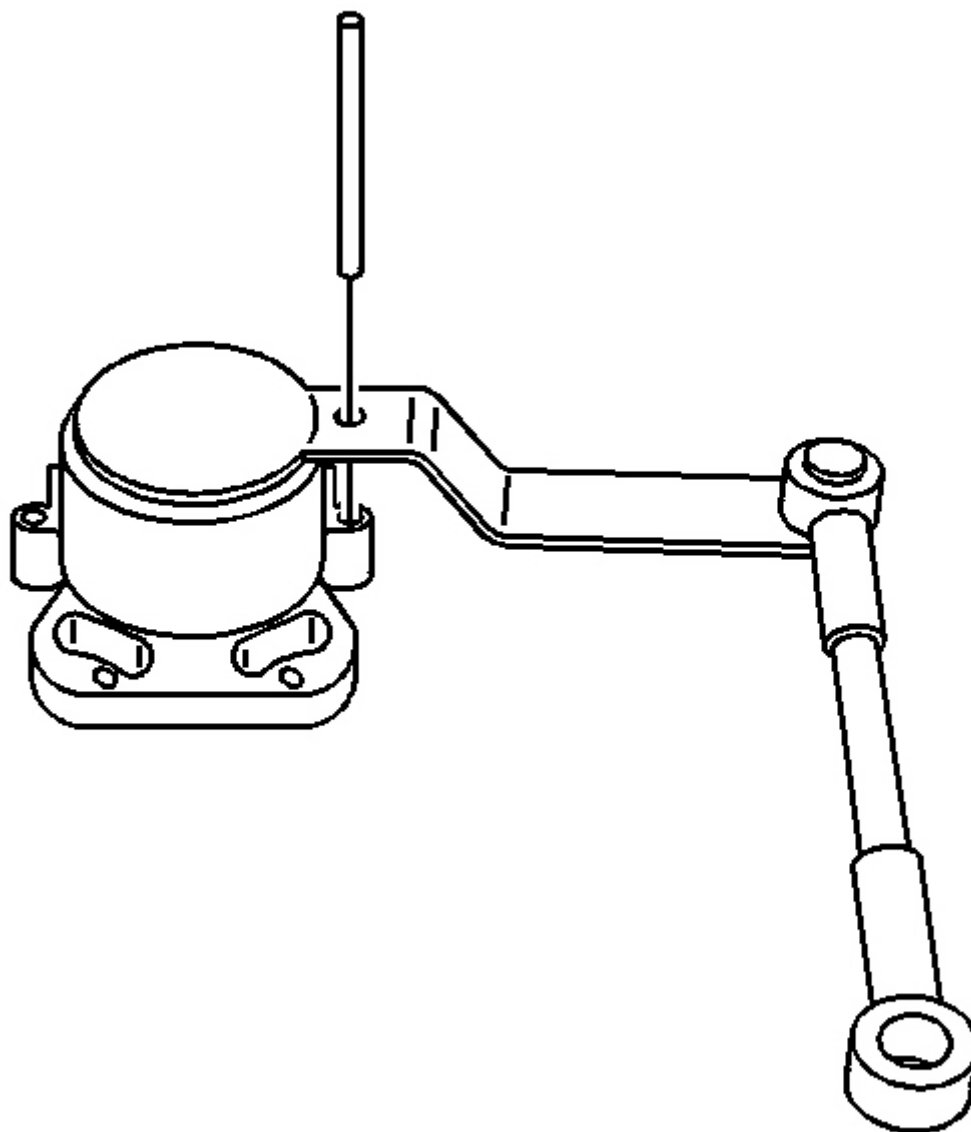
View Of Air Spring Level Sensor Locating Pin
